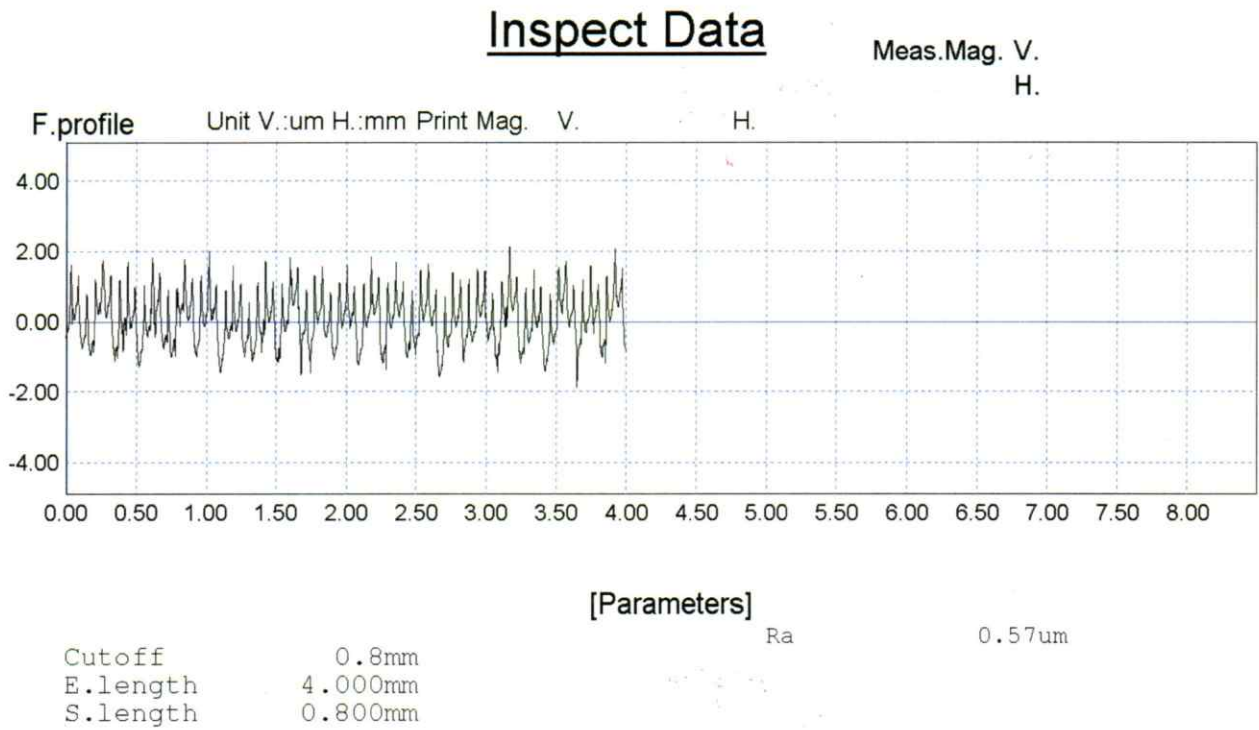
Measurement result of surface roughness of the workpiece
